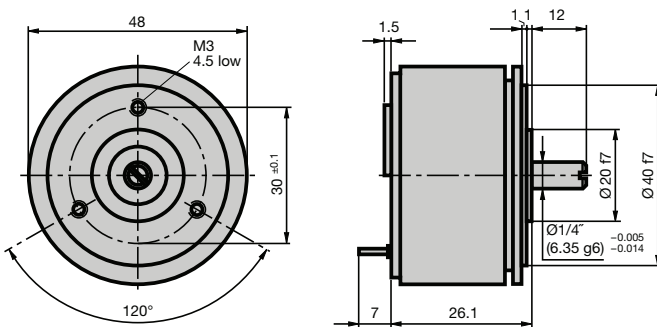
KINAX 2W2 with special drive shaft at front only,
